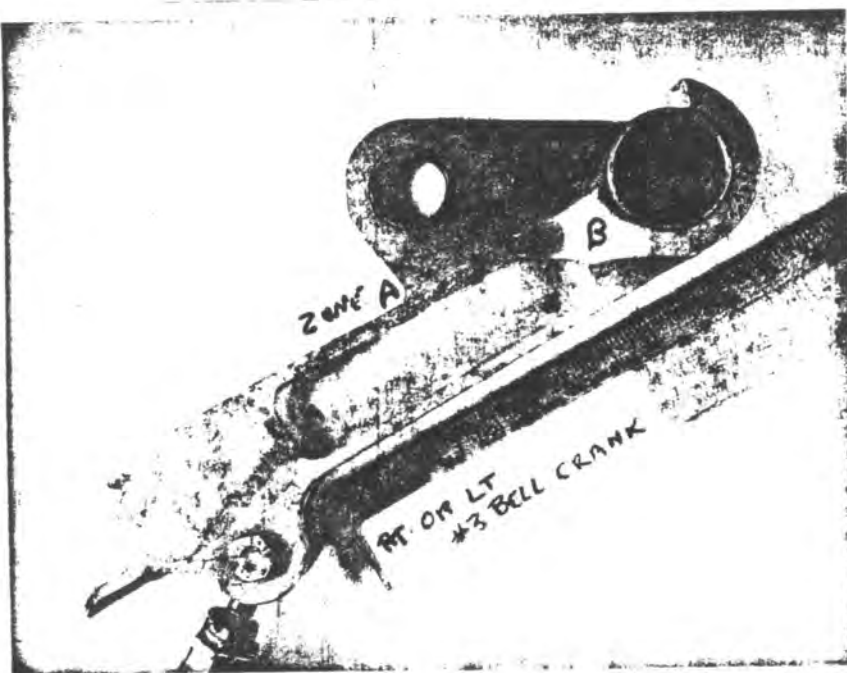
Separated Crack Surface on #3 Bellcrank. 5/8X
